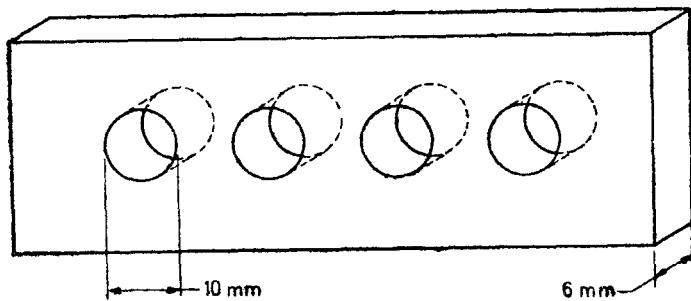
MOULD FOR FORMING FLOW TEST SPECIMENS
